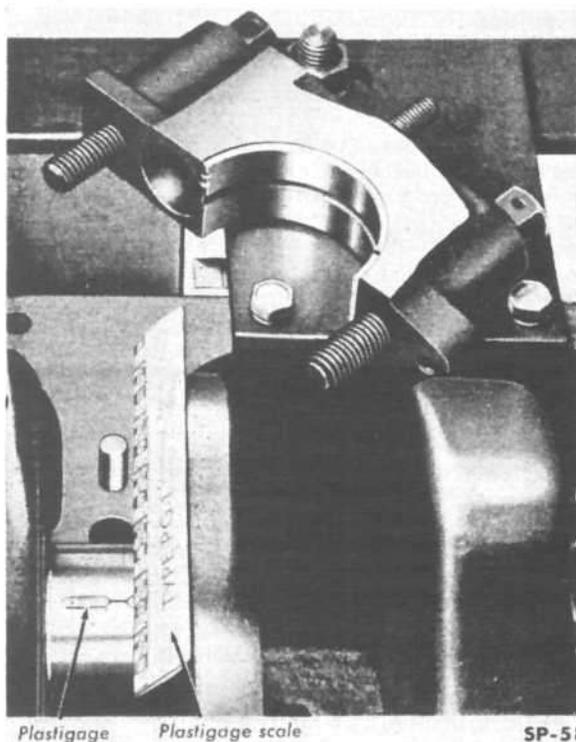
CHECKING MAIN BEARING CLEARANCE WITH PLASTIGAGE
